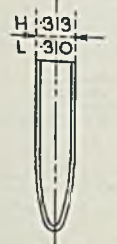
A—Second forming of nose, dimensions and tooling in Fig. 8B
